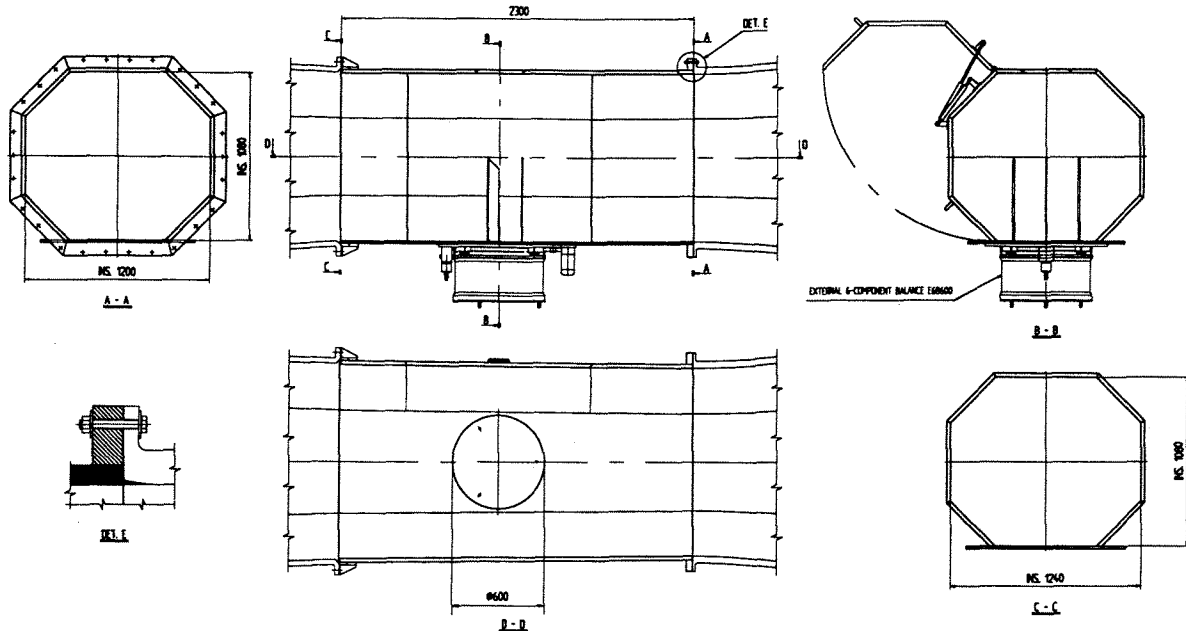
DESIGN DETAILS OF AERODYNAMIC TEST SECTION.
